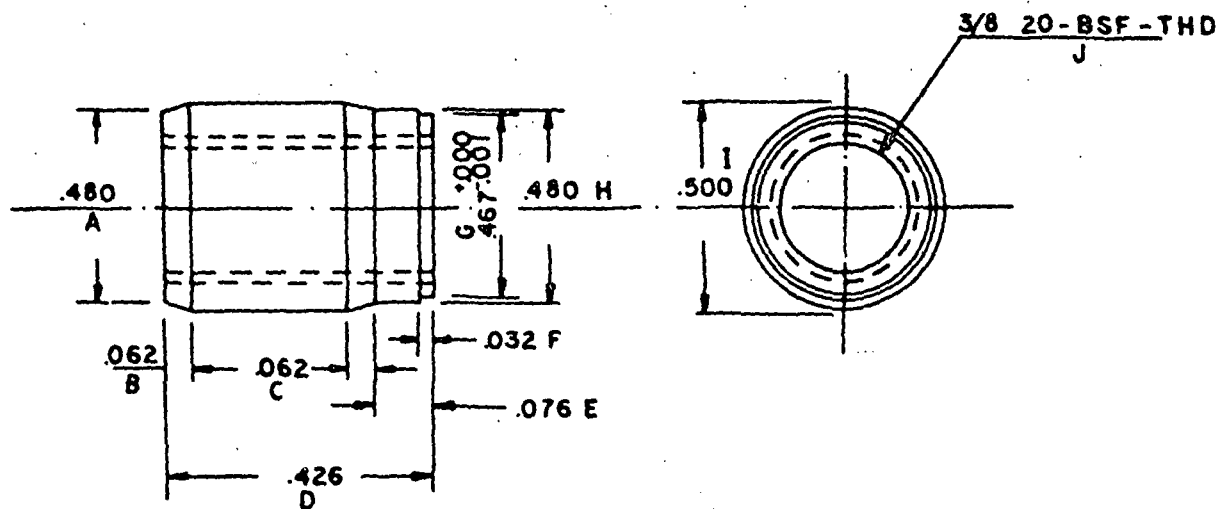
Seal barrel material 304L SS, Part No. T-12014
